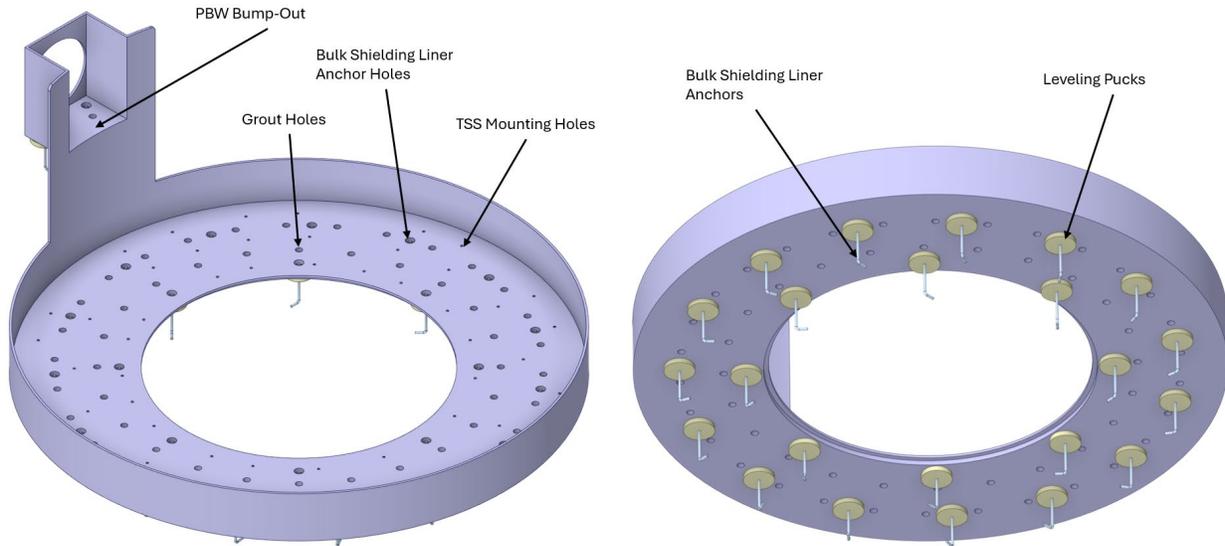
CAD image showing the bulk shielding liner with anchors and shim pucks
